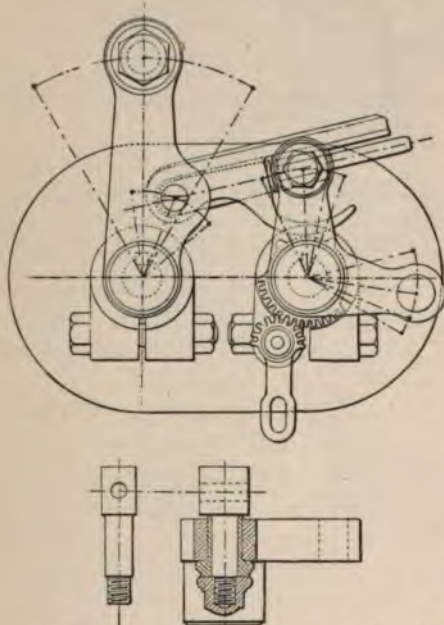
Adamson & Co.: Wheelock-Corliss Steam Engine. Detail of Cylinder. Scale $\frac{1}{16}$ th.
